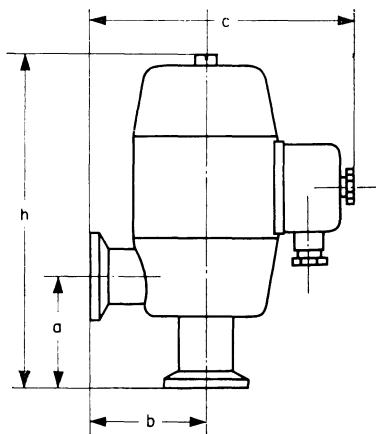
Dimensions of electromagnetic right angle valves supplied by Leybold⁷⁶² (Table 6.24)
